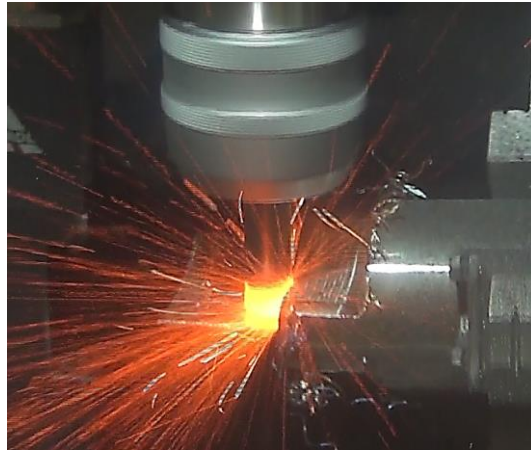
Ceramic cutter use whilst milling a turbine blade (Mitsubishi Advanced Materials & Tools Company, 2016)
